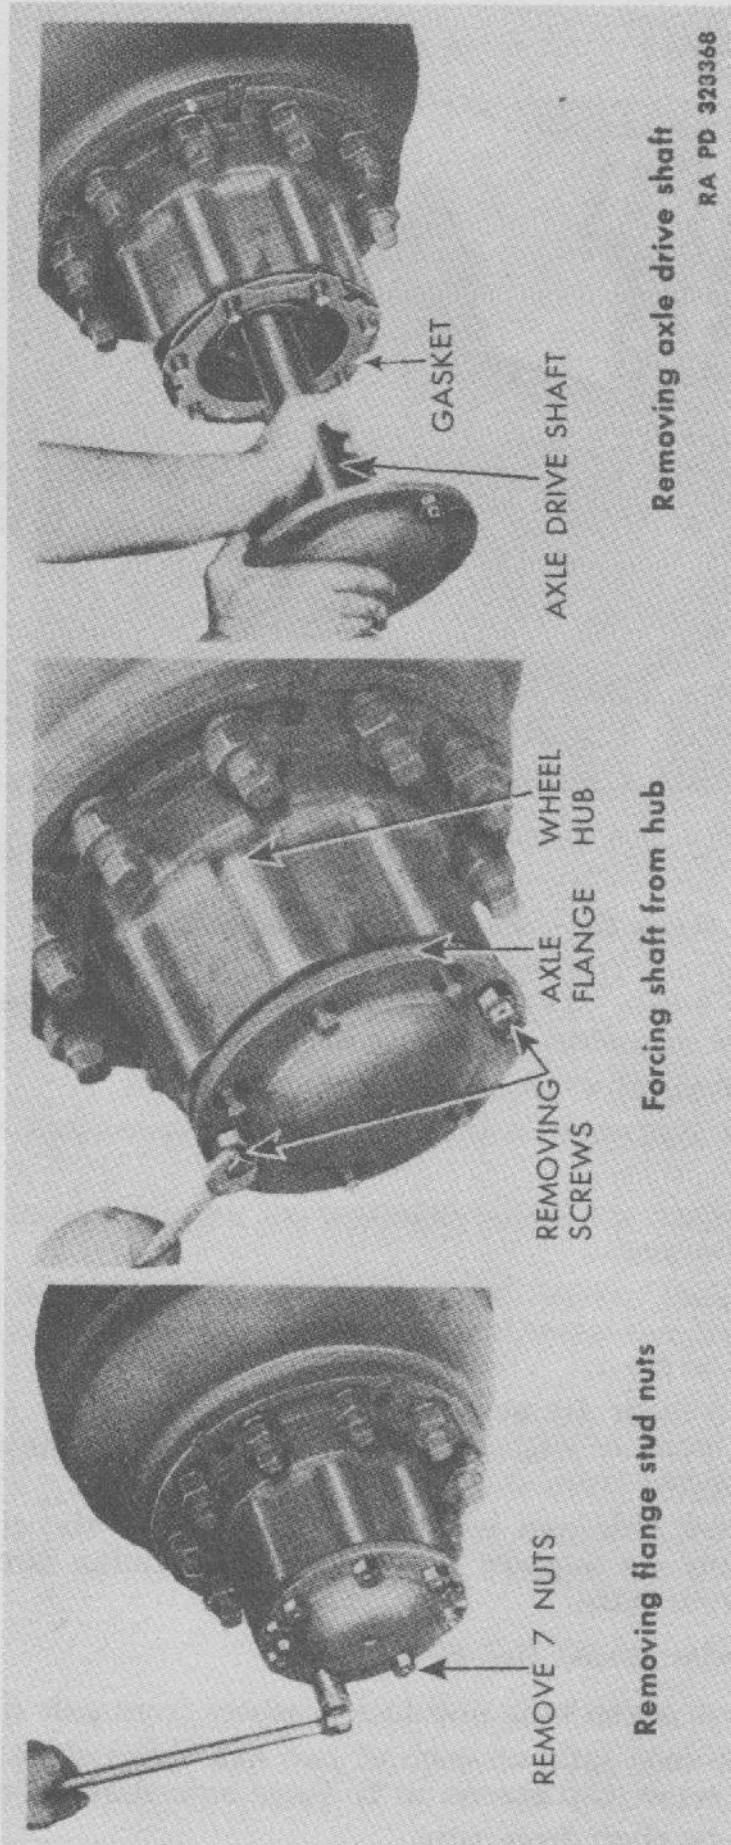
Removing Rear Axle Drive Shaft with Flange
